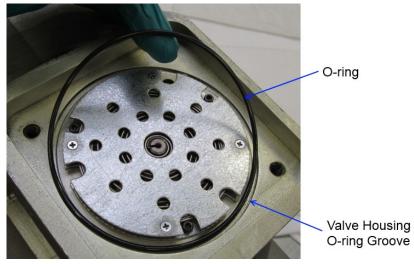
Installation of Final Spring Assembly Screws and O-ring
